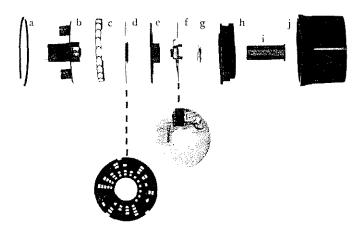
Elements of the optoelectronic switch-in-a-knob that generates a 5-bit code for control of time/div and frequency span. (a) retainer ring, (b) phototransistor holder assembly, (c) spacer ring, (d) shutter, (e) light baffle, (f) LED array holder assembly, (g) spring washer, (h) detent assembly, (i) shaft assembly, (j) knob shell.
